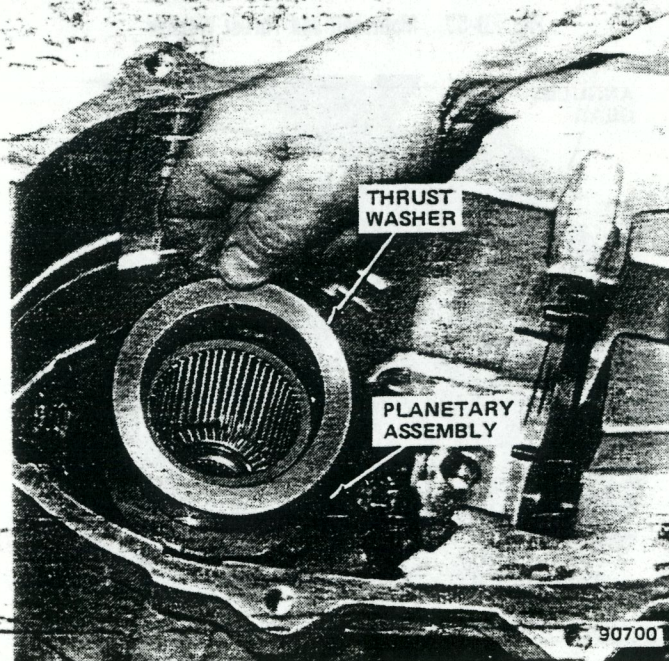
D-60 Planetary Thrust Washer Removal/Installation
